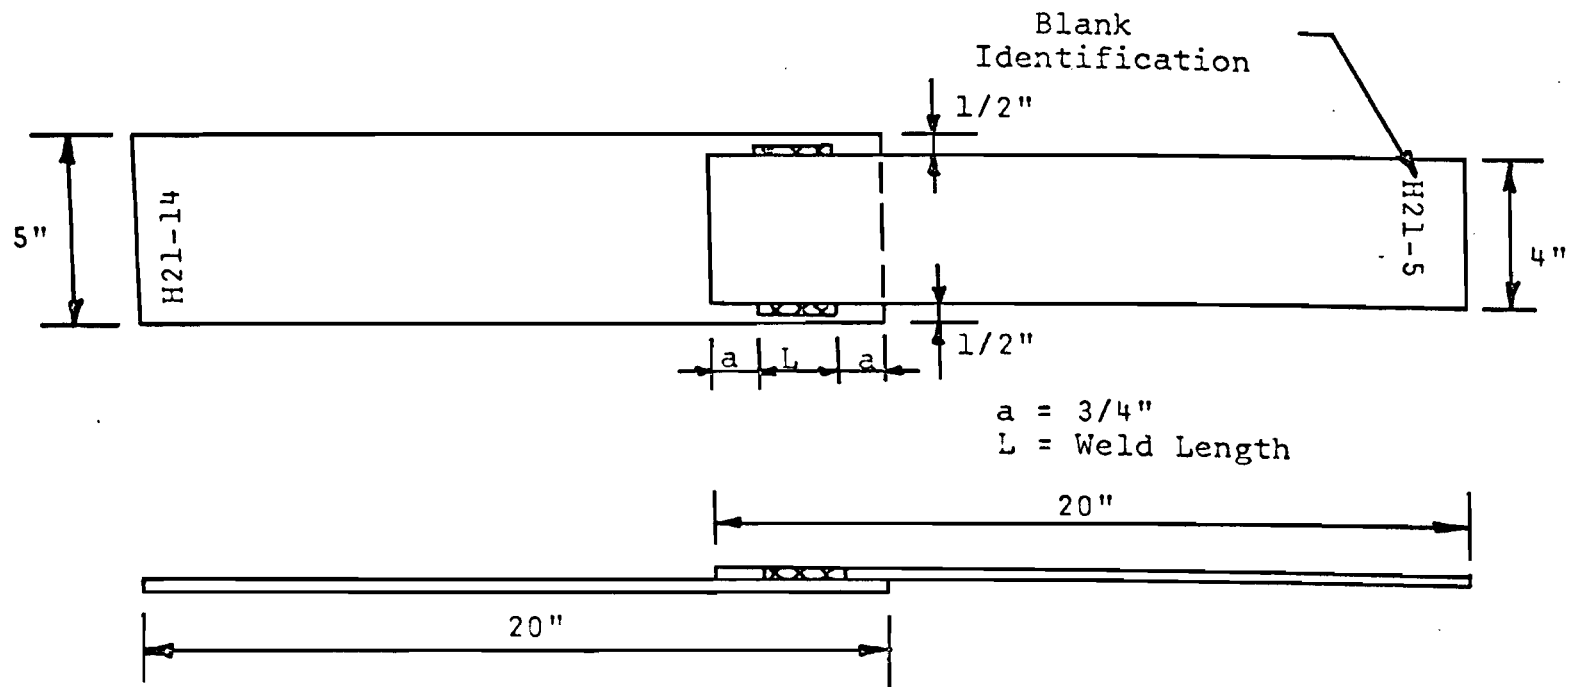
Lap-Joint, Longitudinal Fillet Weld Specimen
